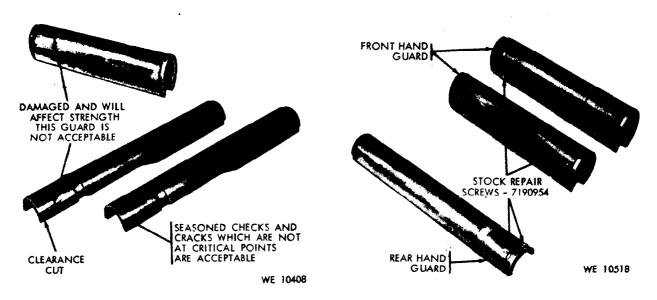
Gun hand guard defects and clearance cut for rifles.
